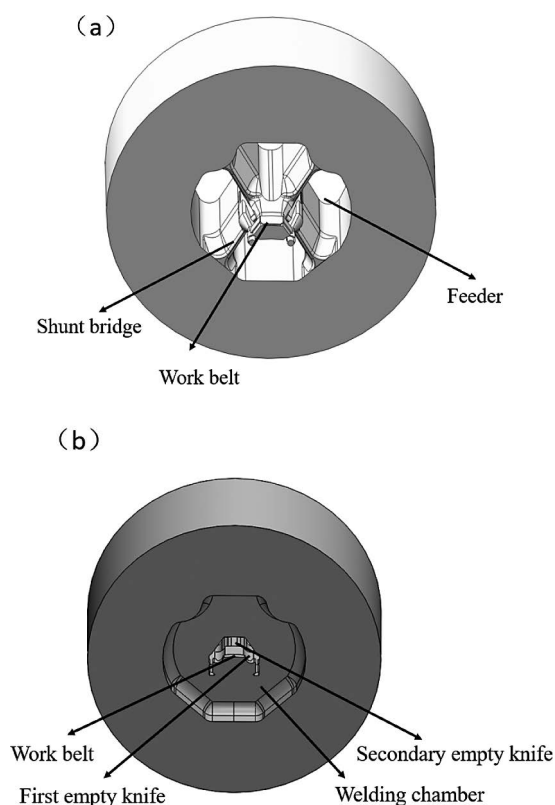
Die 3d drawing: (a) Male die; (b) Master mold
